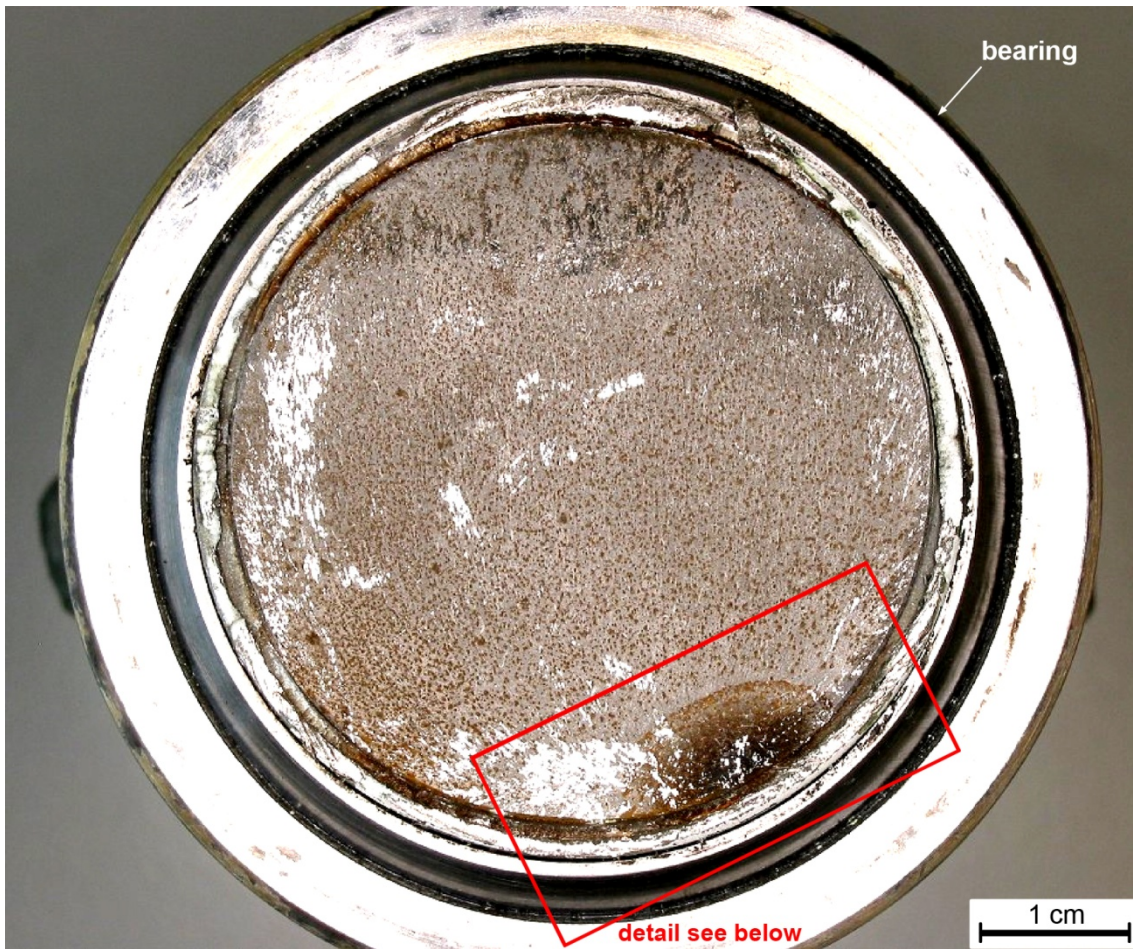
Case History 20.5.3 – Spindle-Side Fracture Surface.
